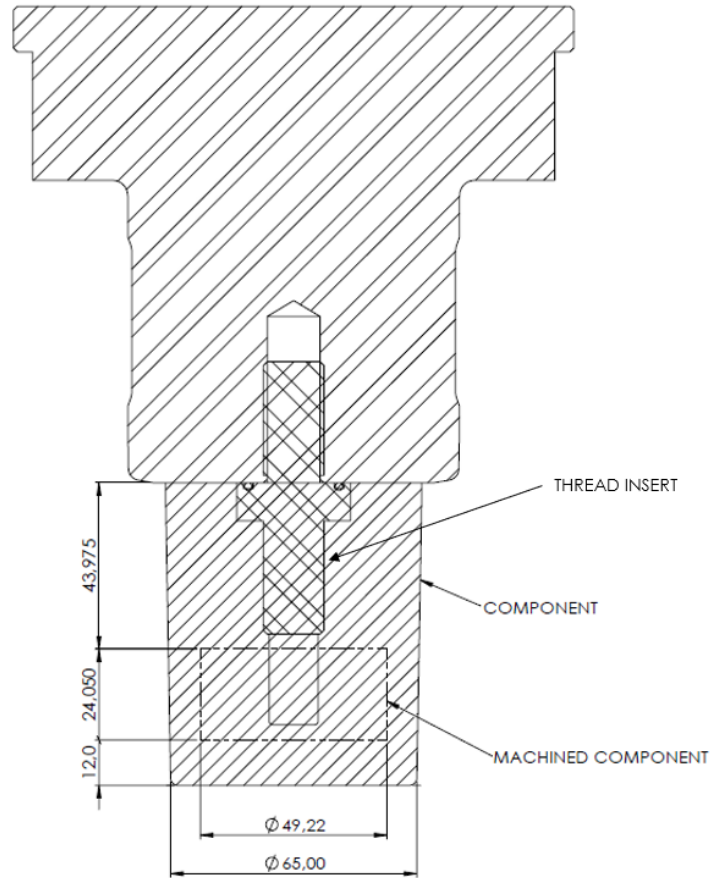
Moulded part attached to threaded insert in the upper half of the tool.
